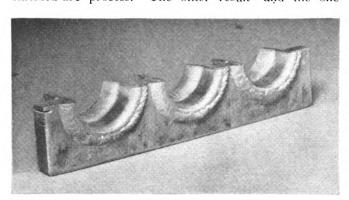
Section of flue sheet in which the tubes have been welded with both bare and coated electrodes
